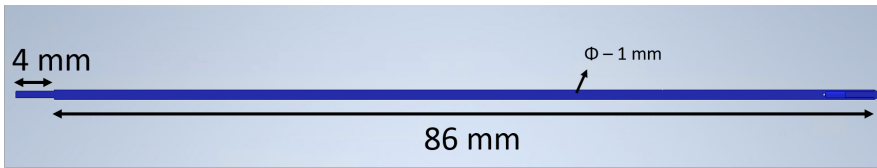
CAD drawing the extension rod along with the PEEK arrowhead fixed to it.
